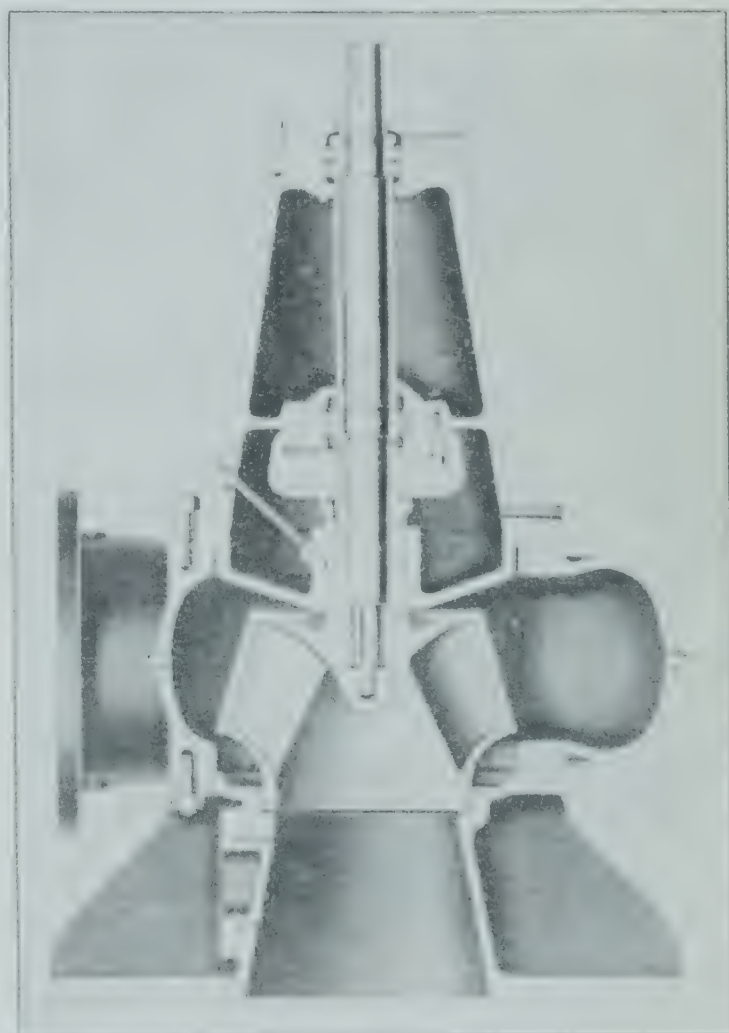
Sectional view of centrifugal pump with wide-passage impeller. (Fairbanks, Morse and Co.)
